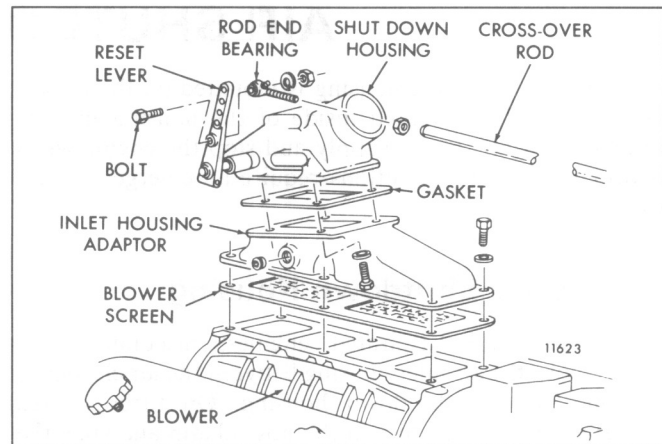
Air Shutdown Housing Details and Relative Location of Parts (Rear of Dual Mounting – Turbocharged Engines)
